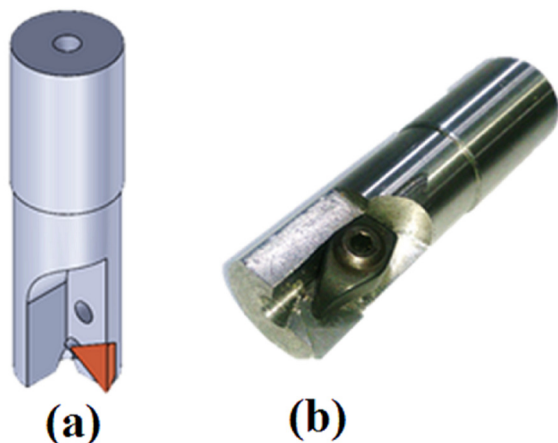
(a) schematic of designed tool and (b) manufactured tool
